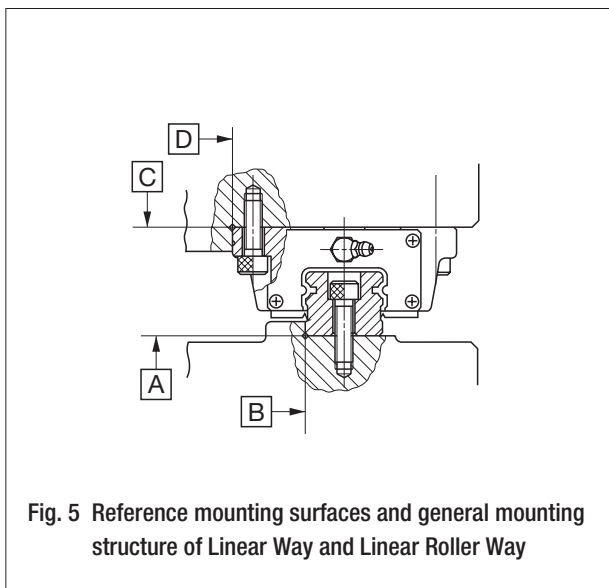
Reference mounting surfaces and general mounting structure of Linear Way and Linear Roller Way
